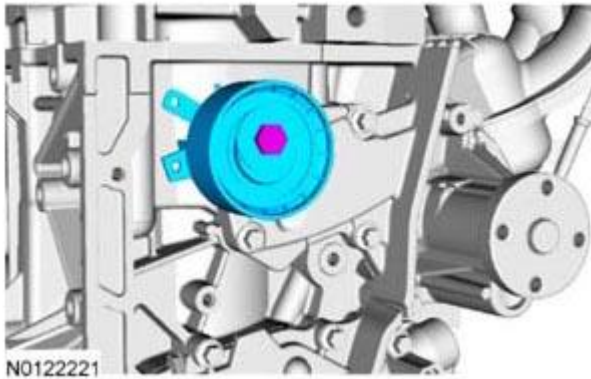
Identifying Bolt And Timing Belt Tensioner
